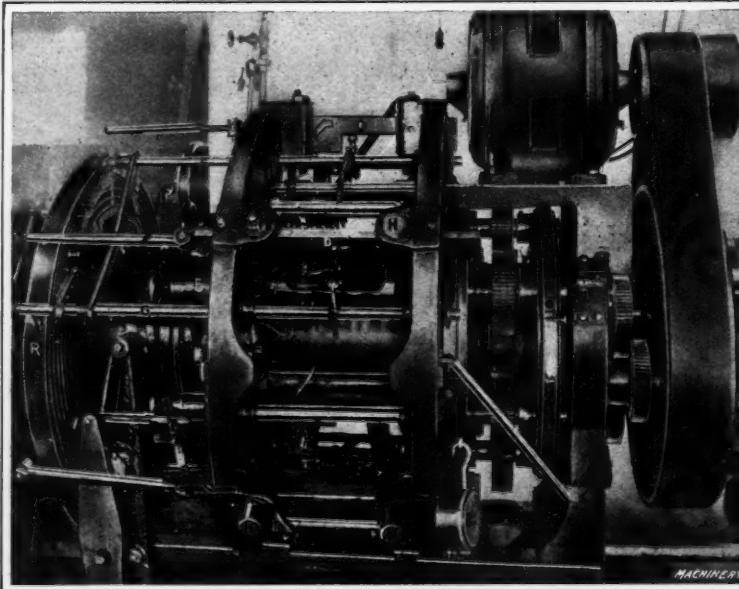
Rear View of Machine shown in Fig. 7, illustrating Operating Cams, Tool-holders, etc.
